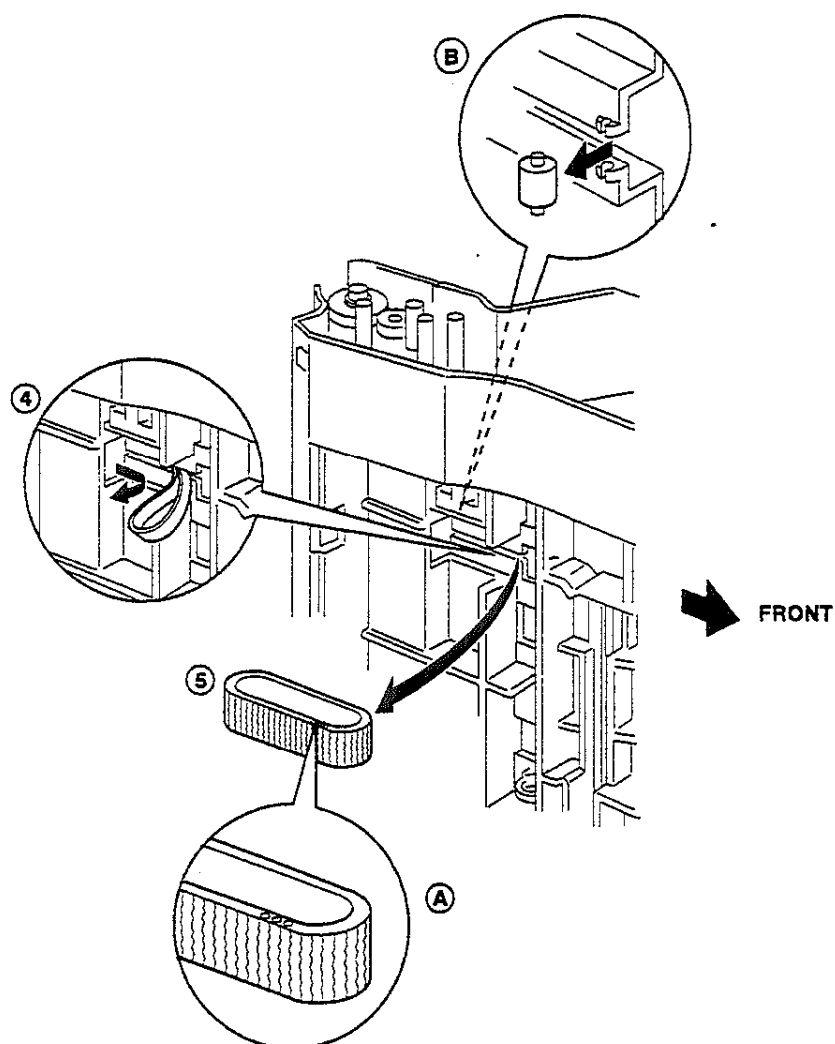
Feed Roll Assembly-1 and -2 Removal
